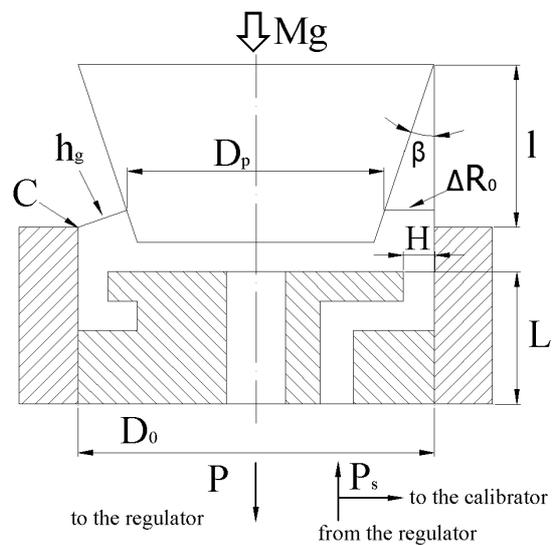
Schematic drawing of the V1600 pneumatic transducer
